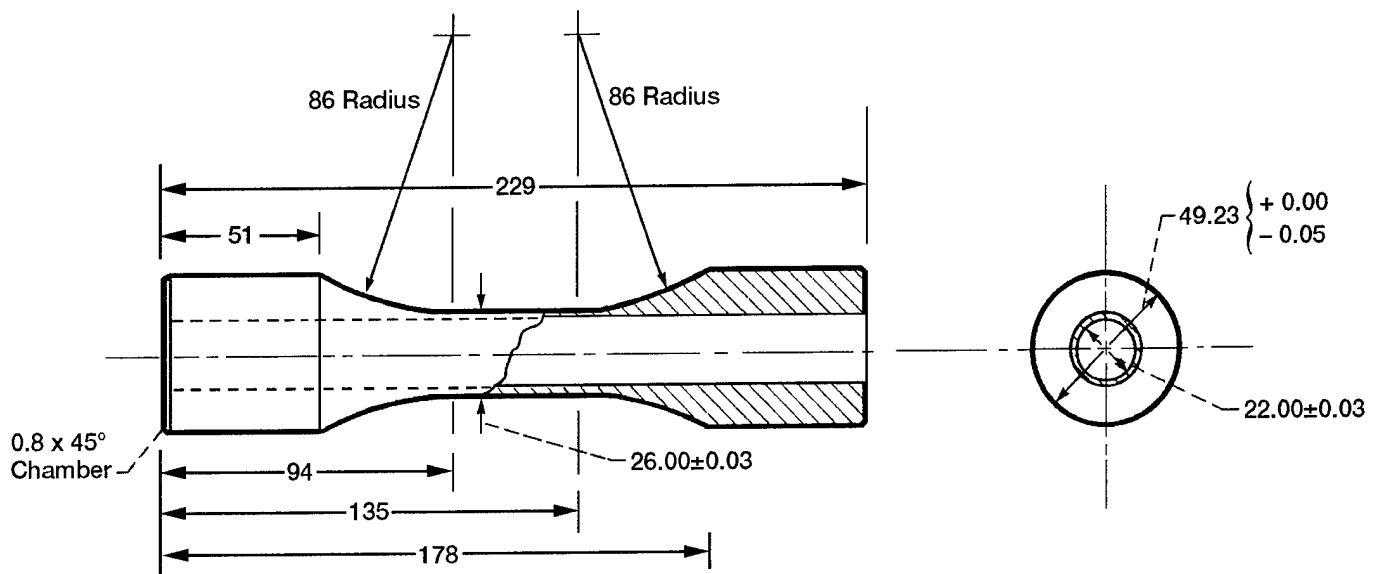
Schematic of tubular, thin-walled, axial-torsional fatigue specimen. All the dimensions are in mm.
